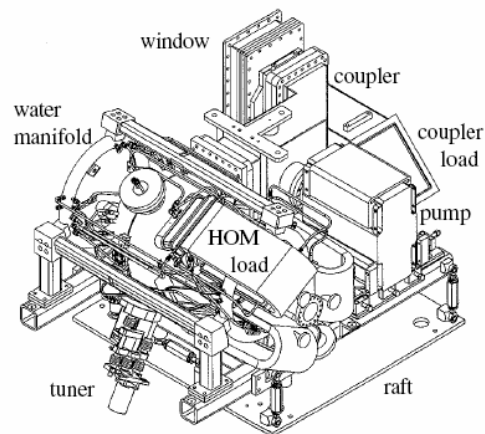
Labeled RF cavity assembly — identifying the accelerating cell, input coupler, HOM damper ports, movable tuner plunger, probe port, and ceramic RF window
